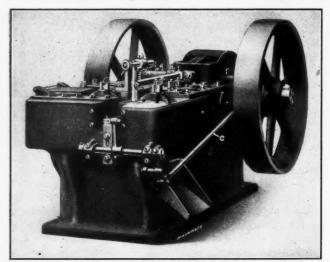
Continuous-motion Wedge Grip Bolt and Rivet Header built by the National Machinery Co.
